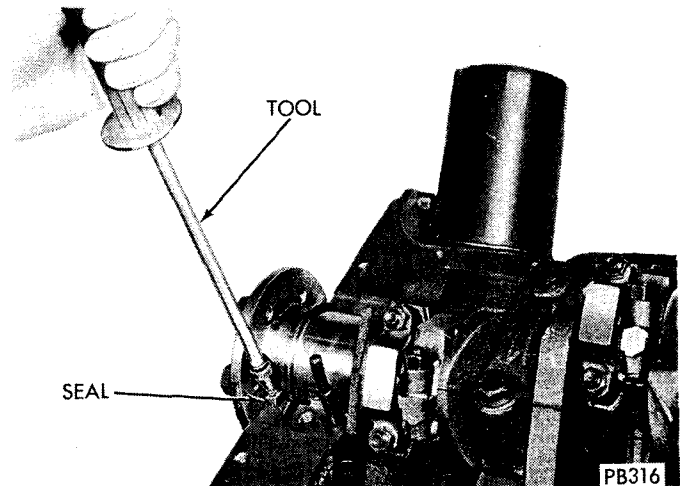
Removing Upper Oil Seal with Tool C-4148
